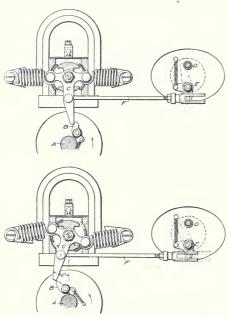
Bosch Mechanical Make-and-Break Igniter.
